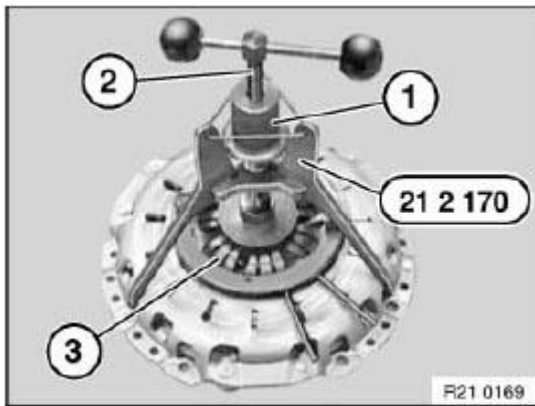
Identifying Knurled Screws, Spindle And Diaphragm Spring
